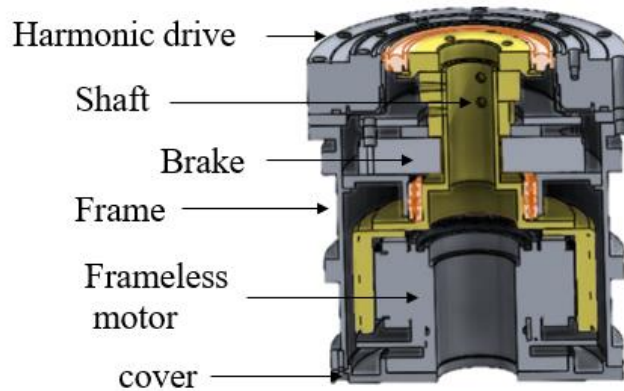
Version 1 layout. Also, moving parts are in yellow, bearings in orange, and fixed parts in grey color.
